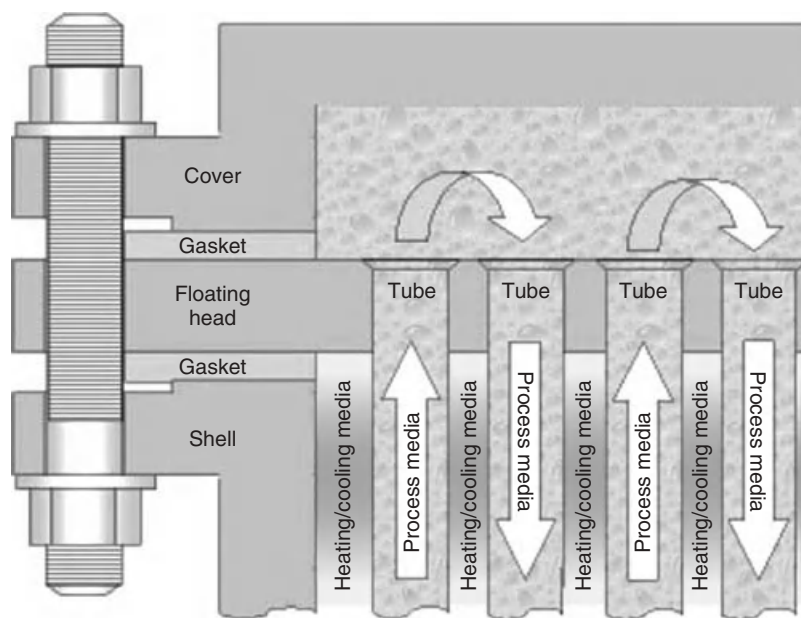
Shell-and-tube heat exchangers. (Courtesy of Garlock, an EnPro Industries family of companies.)
